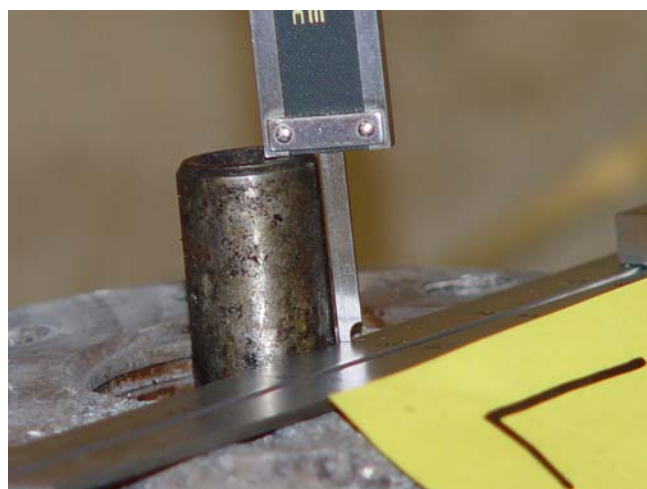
PISTON ROD LENGTH (BACK OF HUB)
